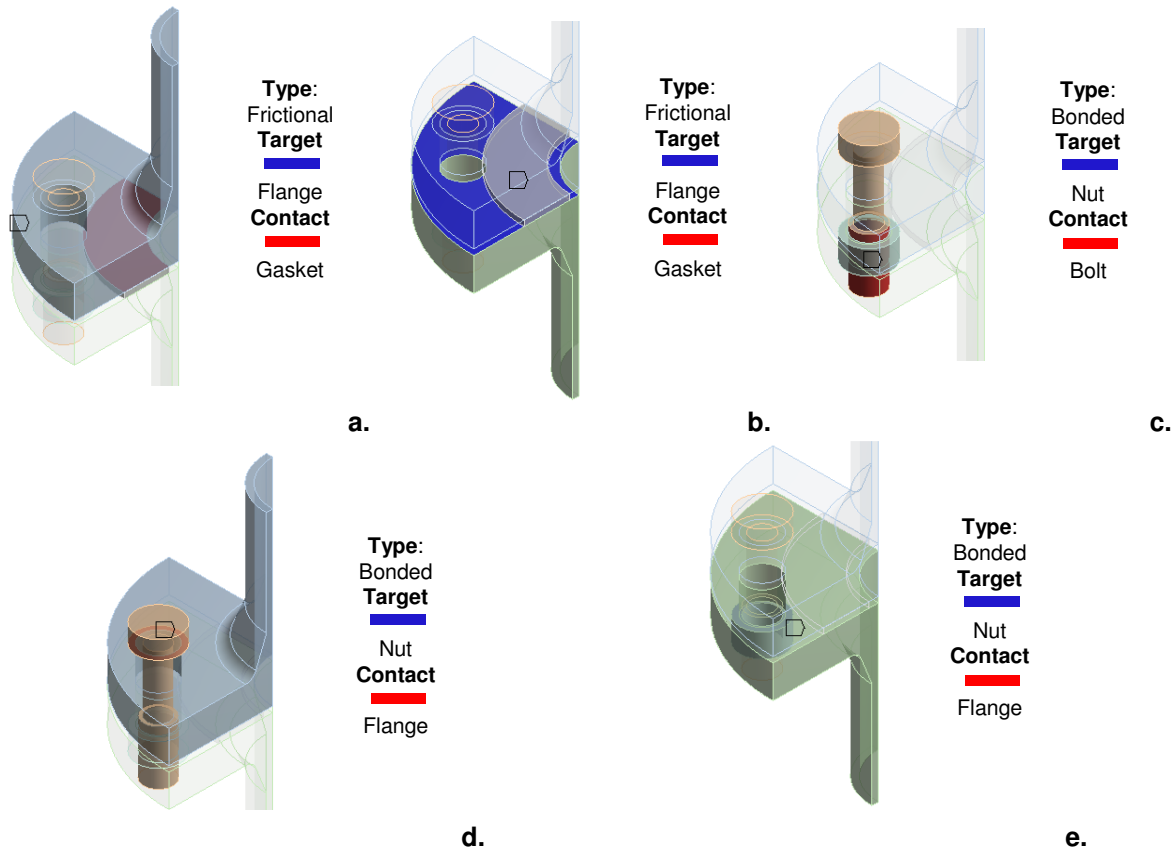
Contact interfaces between: (a) gasket and top flange, (b) gasket and bottom flange, (c) nut and bolt, (d) bolt and top flange, and (e) nut and bottom flange for the flat and raised face flanges
